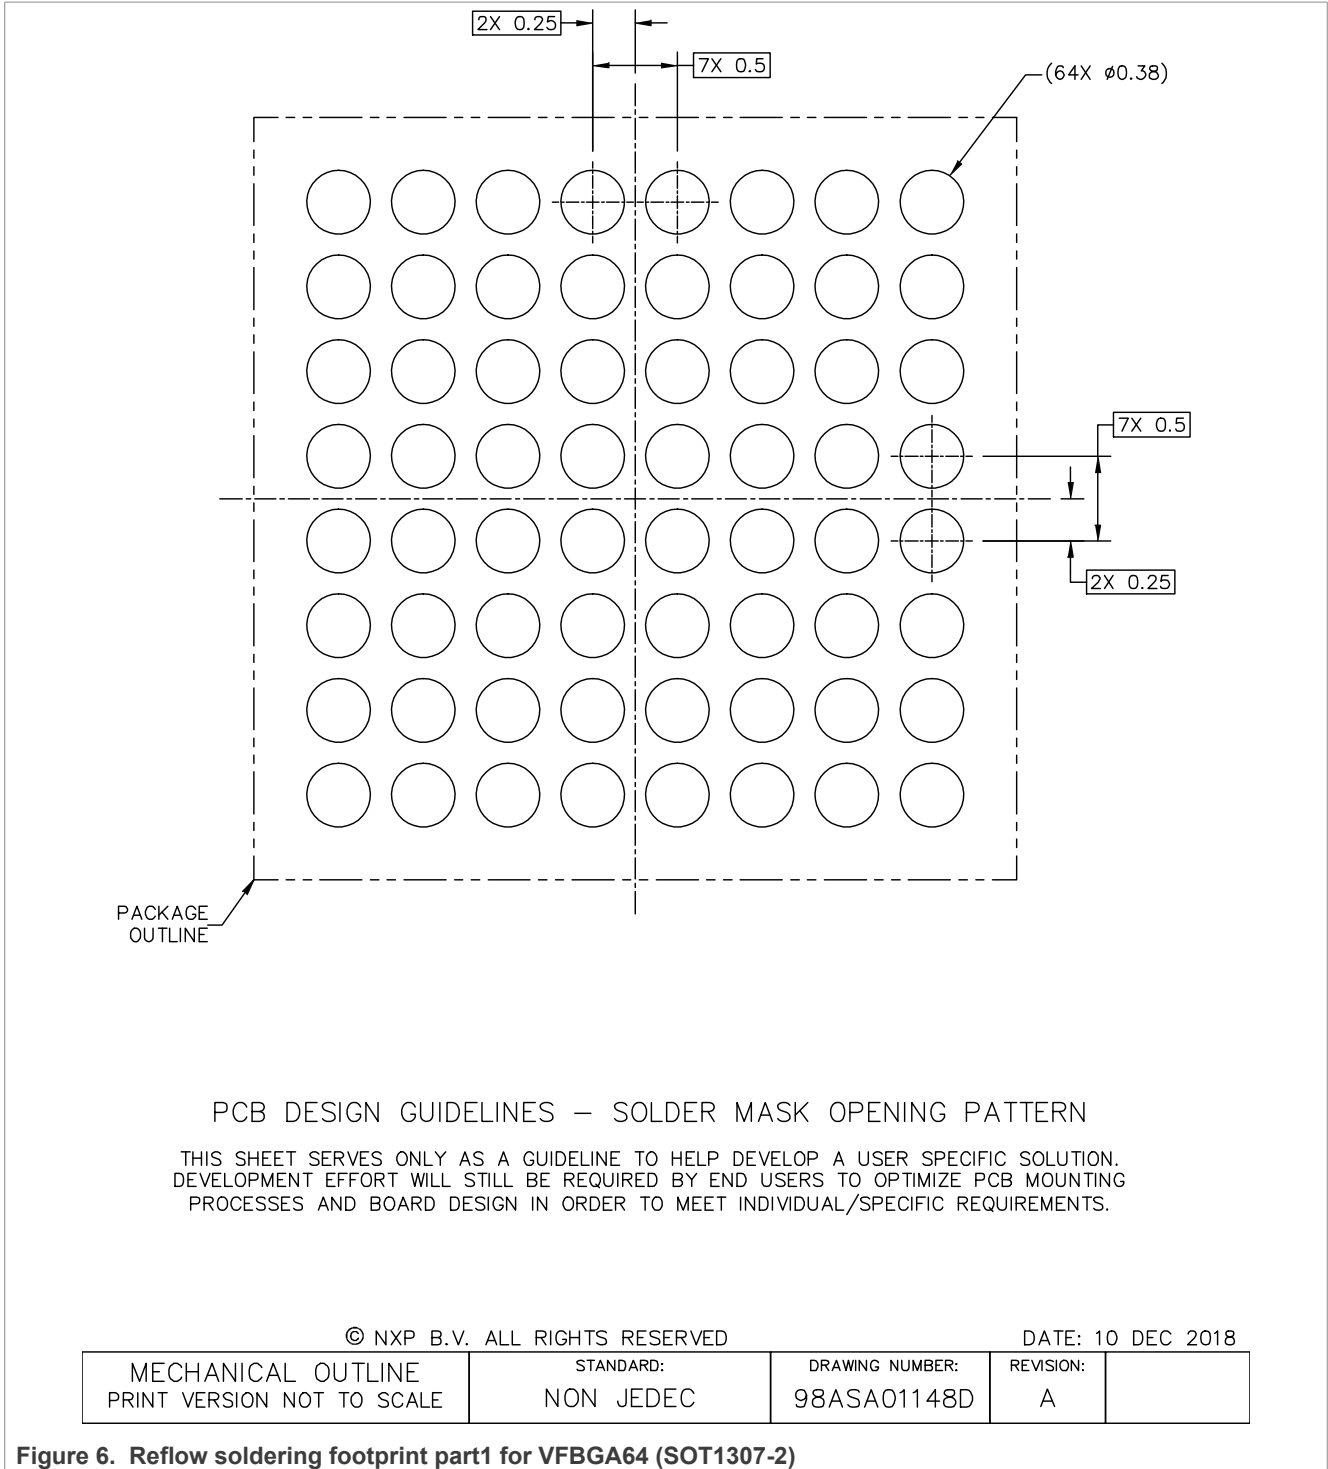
Reflow soldering footprint part1 for VFBGA64 (SOT1307-2)
